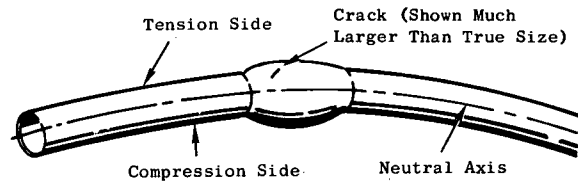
Sketch showing location of crack in weld nugget of T-111 alloy tube removed from corrosion test loop boiler.
